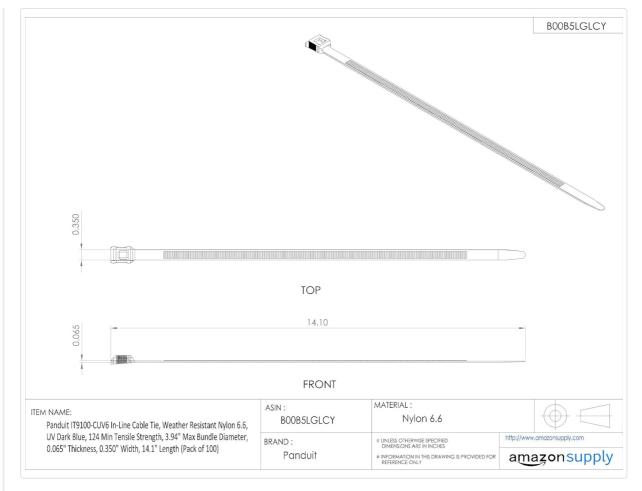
Technical drawing illustrating the dimensions and specifications of the Panduit IT9100-CUV6 cable tie.
